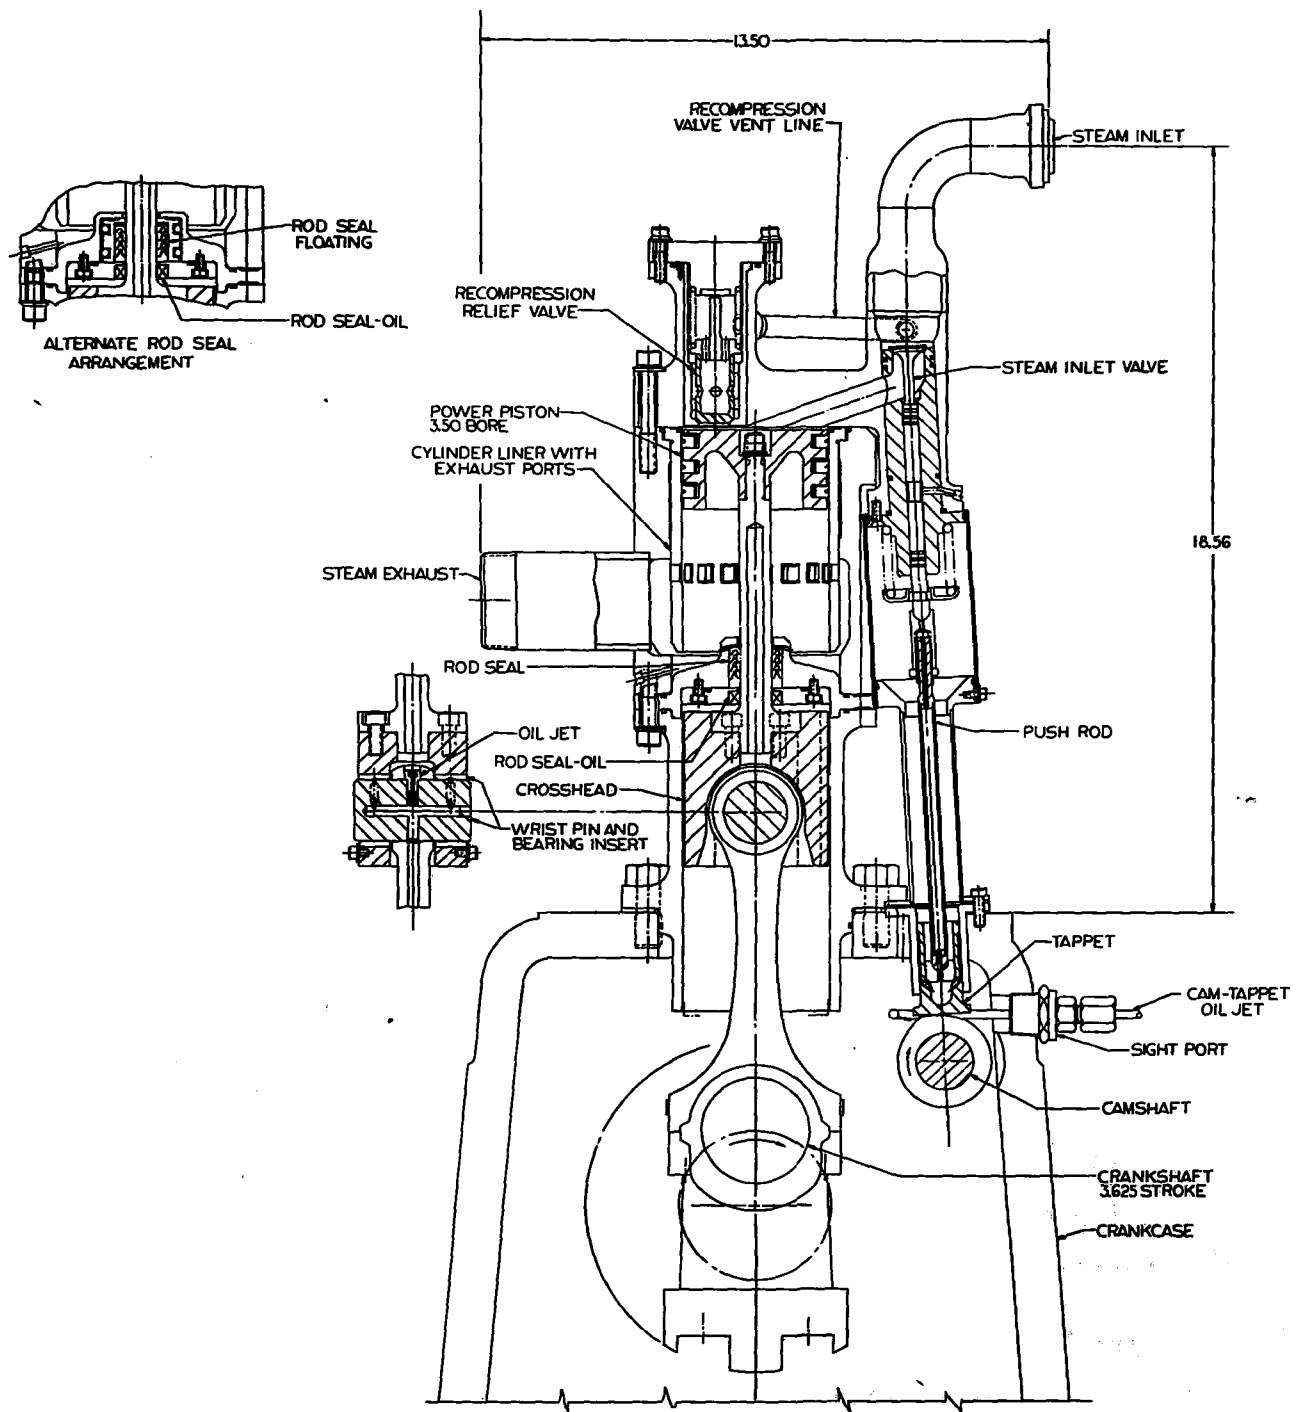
Crosshead Piston Expander (Dwg. 707E742)
